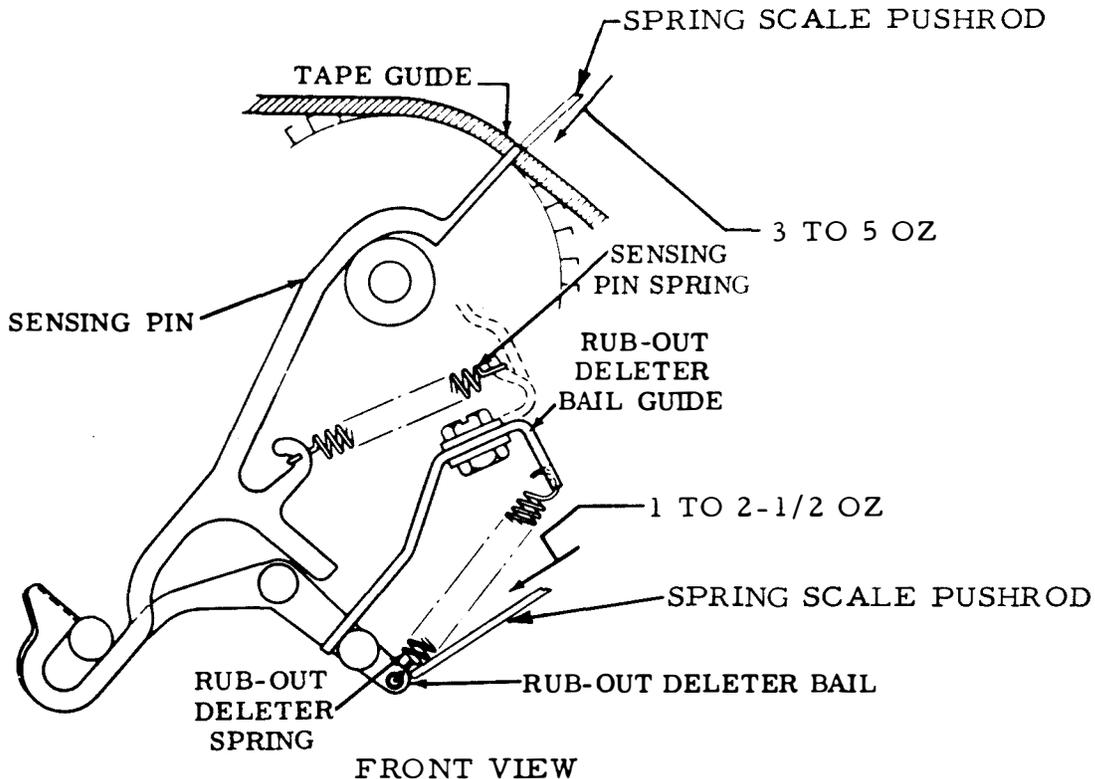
Sensing Pin Spring and Rub-Out Deleter Bail Spring
